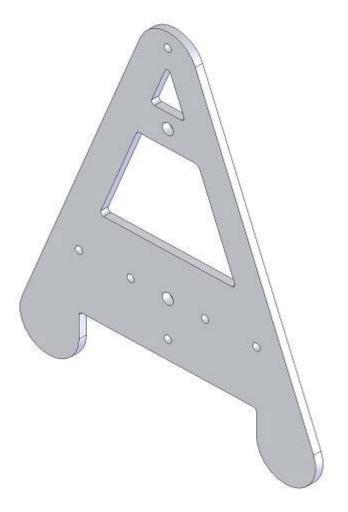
Side frame of ball-on-beam system made from polycarbonate. A part drawing is generated in a CAD program and then machined in the water jet cutter.
